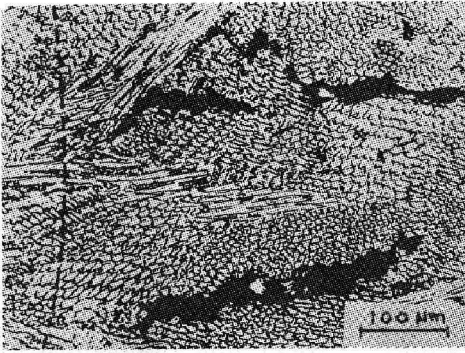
Typical appearance of hot cracks in stainless steel weld metal.
